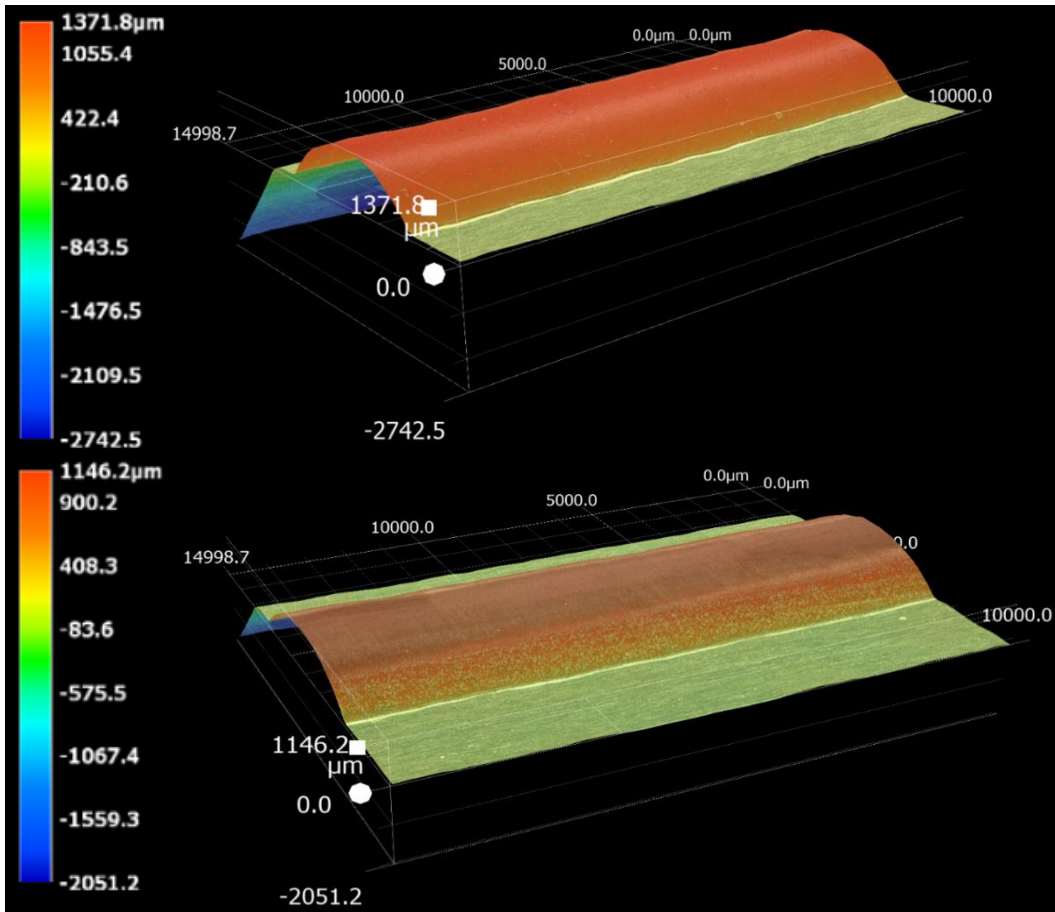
3D profiles of Recoater arm no. 3 before (top) and after (bottom) the print
